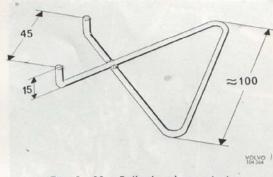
39. Puller for plug contact Material: 2 mm (5/64") welding wire
